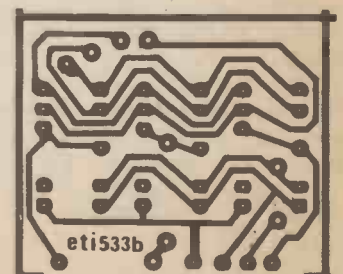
Printed circuit layout for the display board. Full size 41 x 35 mm.
